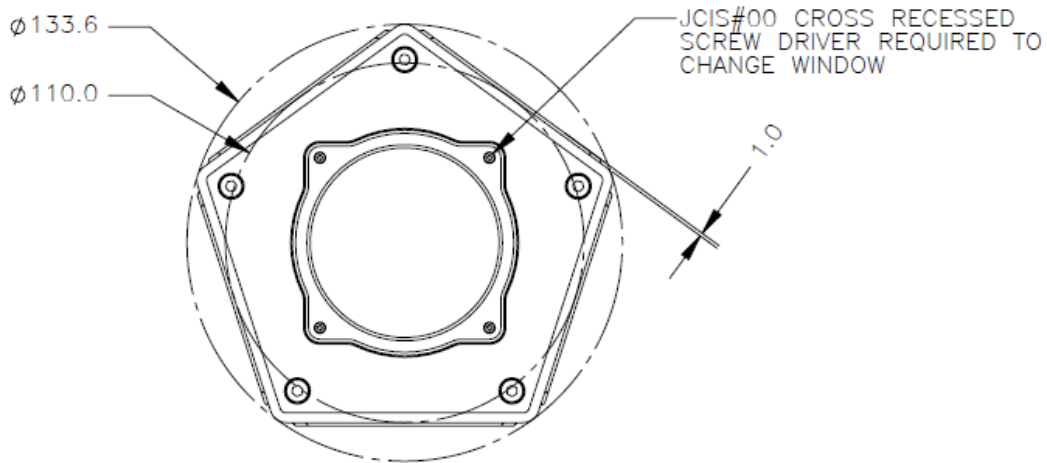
Camera dimensional drawing, top view (measurements in mm)
